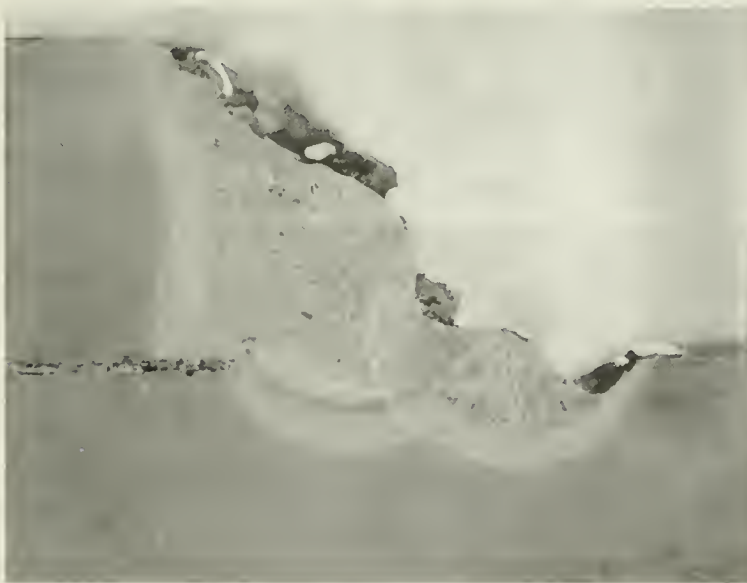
MULTI-PASS OVERHEAD UNDERWATER WELDED LAP JOINT #5 USING E11018 ELECTRODE (5x, 2% NITAL)
